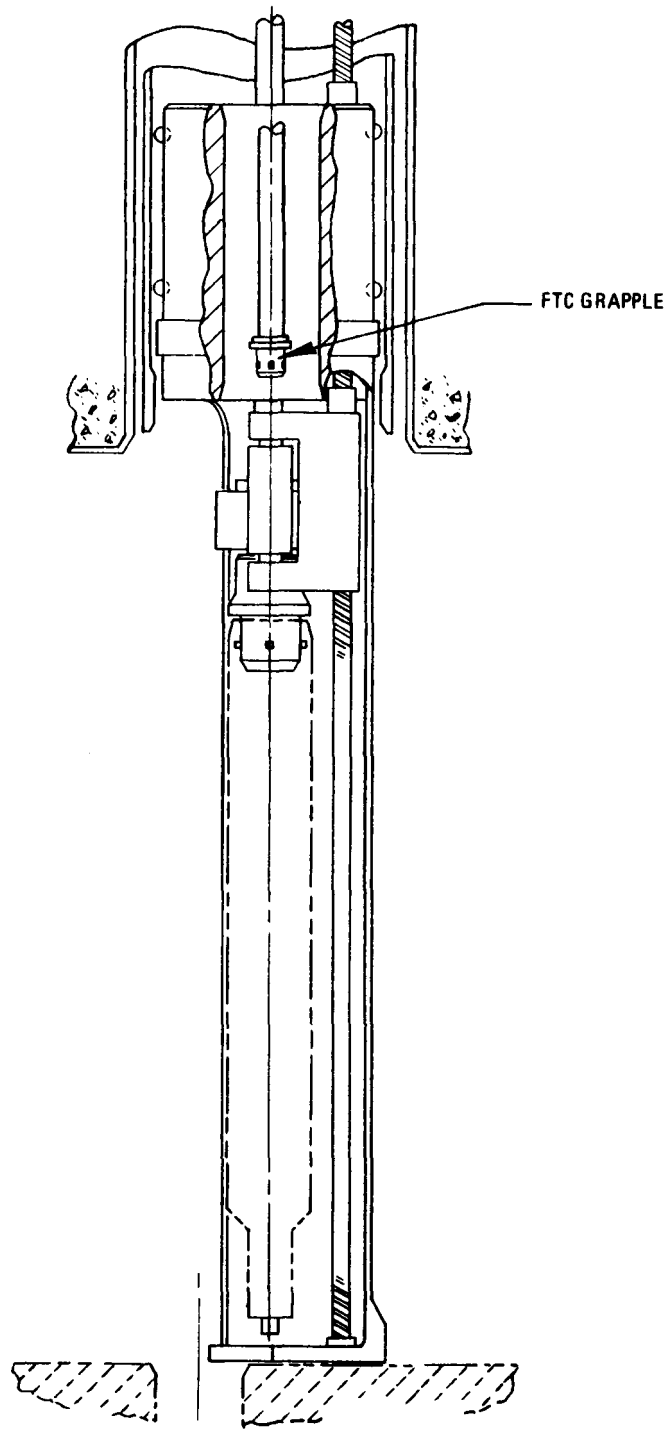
Fuel handling machine grapple withdrawn and centered
